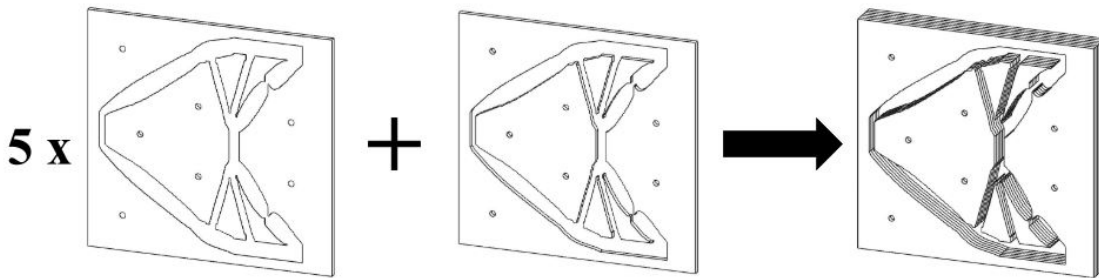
Gripper #2 mould assembly: five 4.5 mm through cut sheets stacked and mounted on a base plate etched with the gripper topology.
